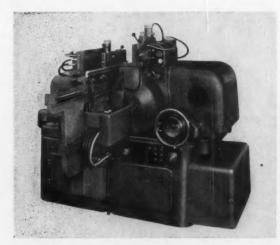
Landis centerless multiple-diameter shaft grinding machine with work-handling fixture
